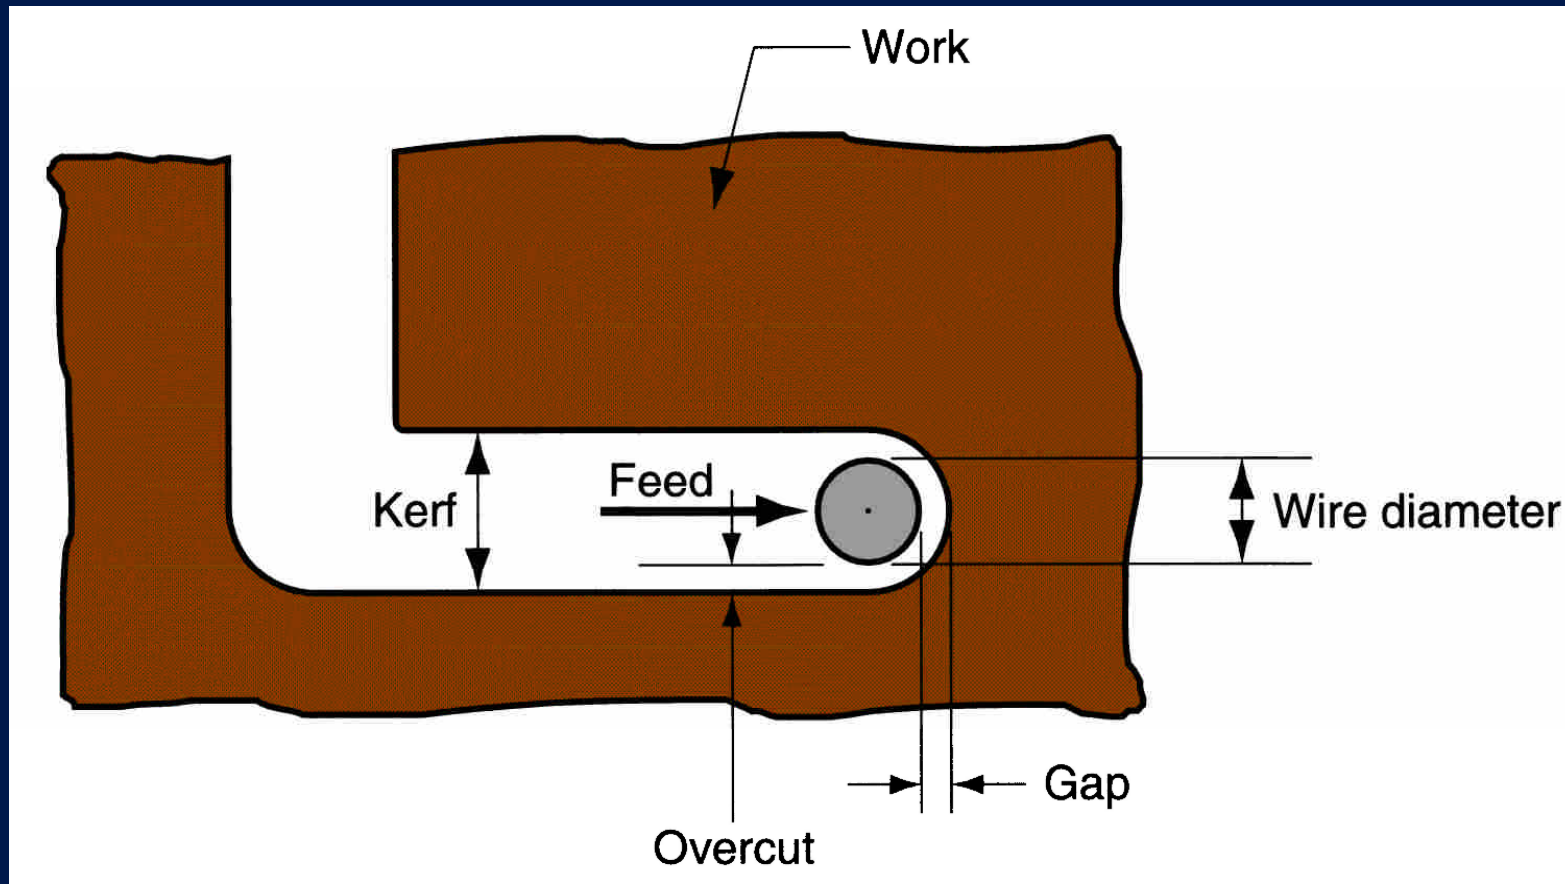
Definition of kerf and overcut in electric discharge wire cutting
